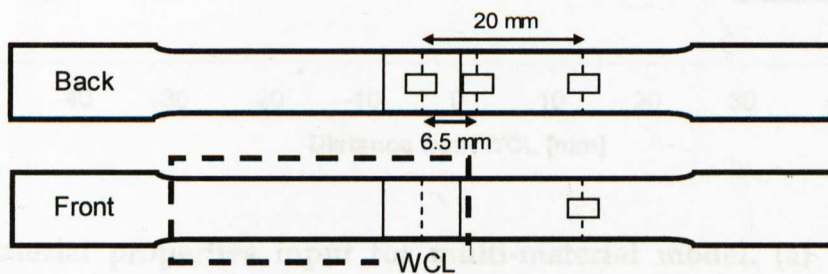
Positions of SGs on the back and front surfaces of cross-weld specimens.
